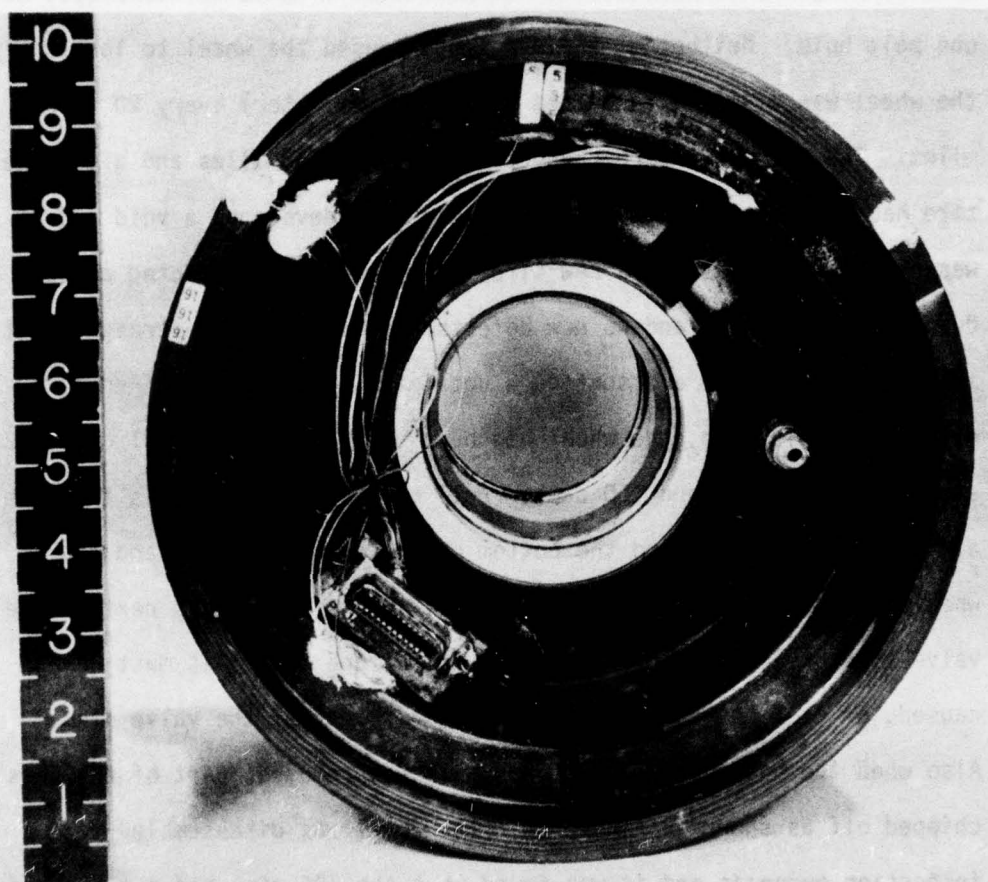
Wheel after 400 Mile Camber Roll and 1400 Mile Straight Roll
